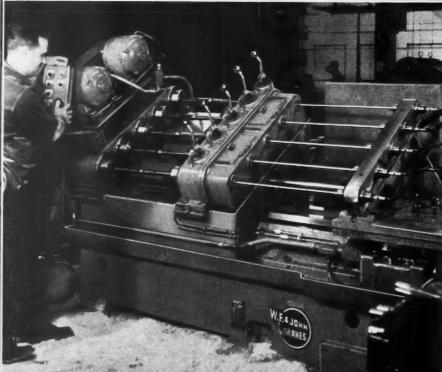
Five-spindle, deep-hole drilling machine employed to drill holes 0.4823 inch in diameter by 14 inches long in one end of the main shafts
